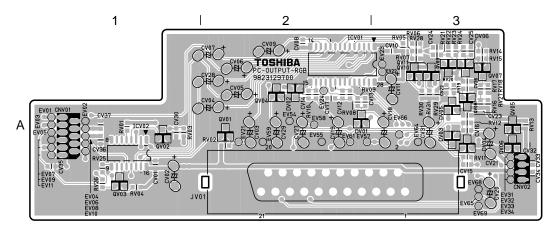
EU09 Output-RGB PC Board (Bottom side)
